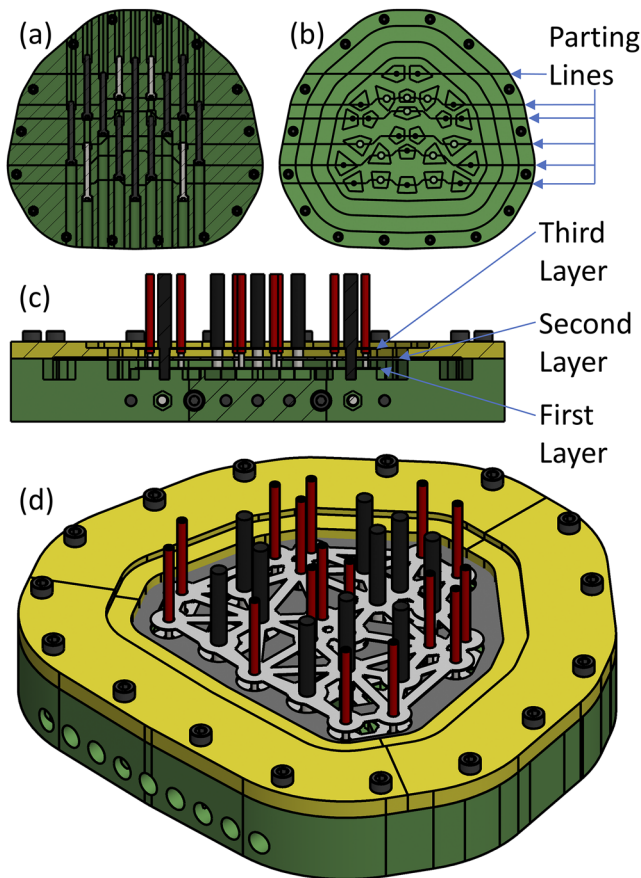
Mold design used to construct the final array. (a) Bottom view showing bolts attaching seven fixtures to create the mold. (b) Top view showing parting line locations sandwiching the fiber ends. (c) Cross section showing three layers captured within the mold. (d) Isometric view of the full mold assembly before encapsulating PolyDiMethylSiloxane (PDMS) is poured.
